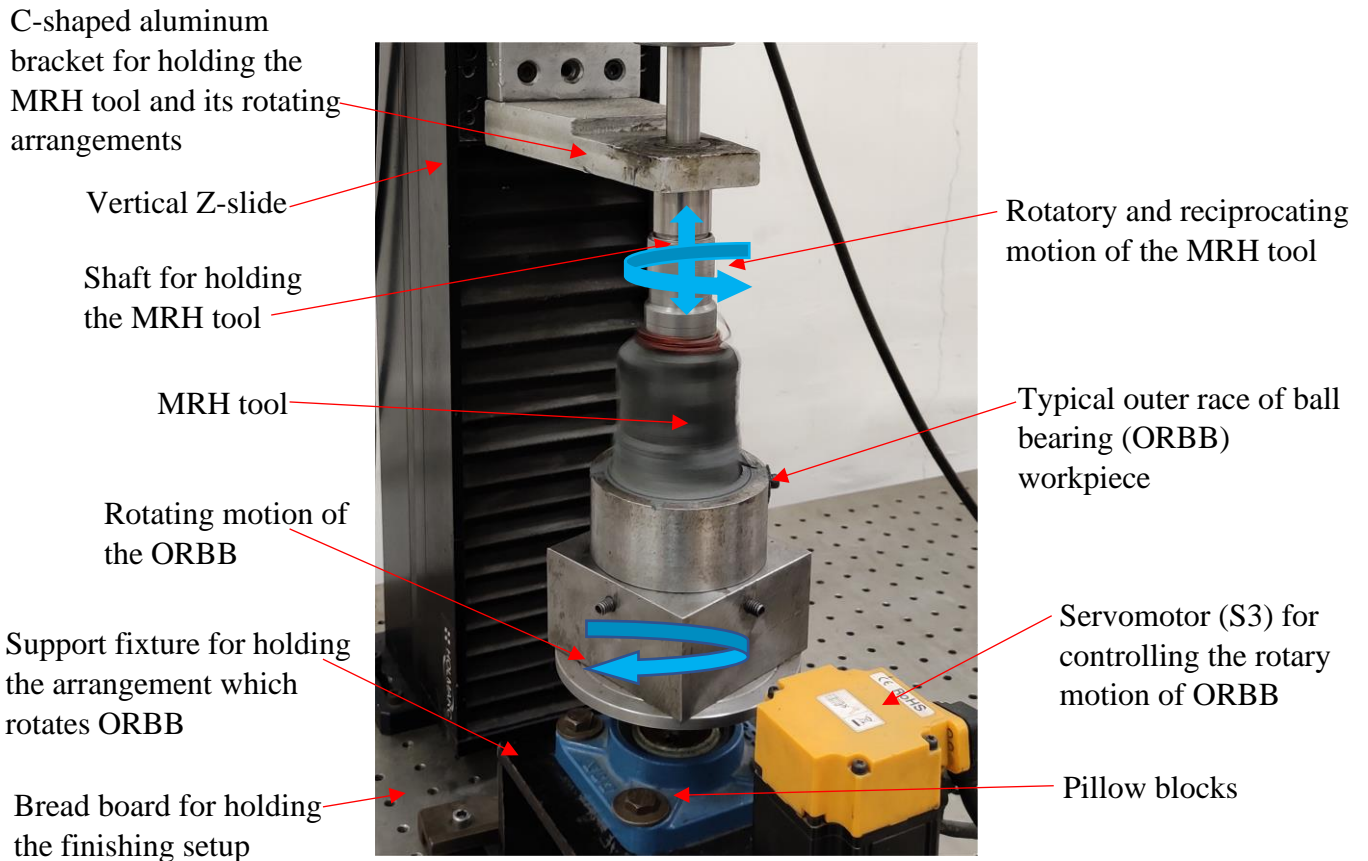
Finishing setup of rotational magnetorheological honing (R-MRH) process for finishing internal surface of the typical outer race of ball bearing (ORBB) and enlarged view of the typical ORBB workpiece.
